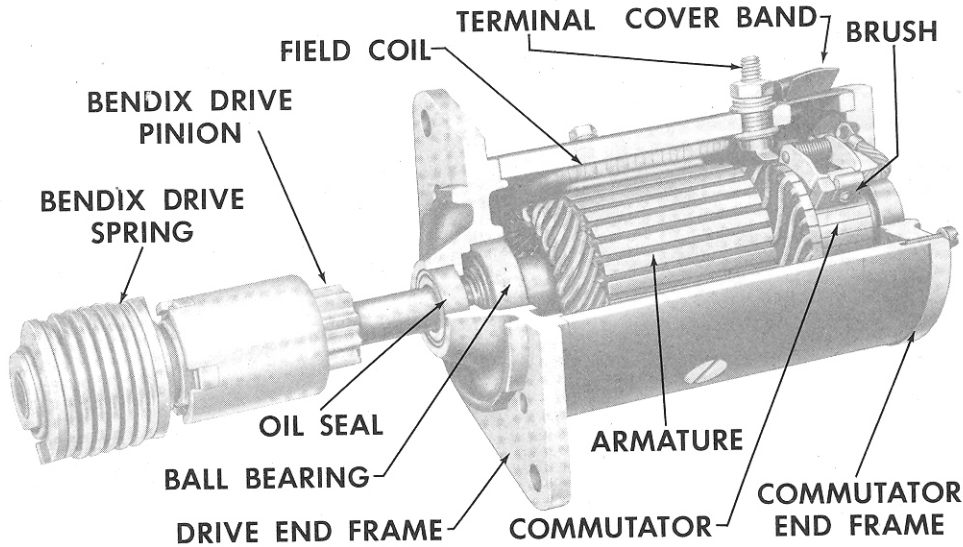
Cut-away view of a cranking motor using a barrel type inboard Bendix drive.
